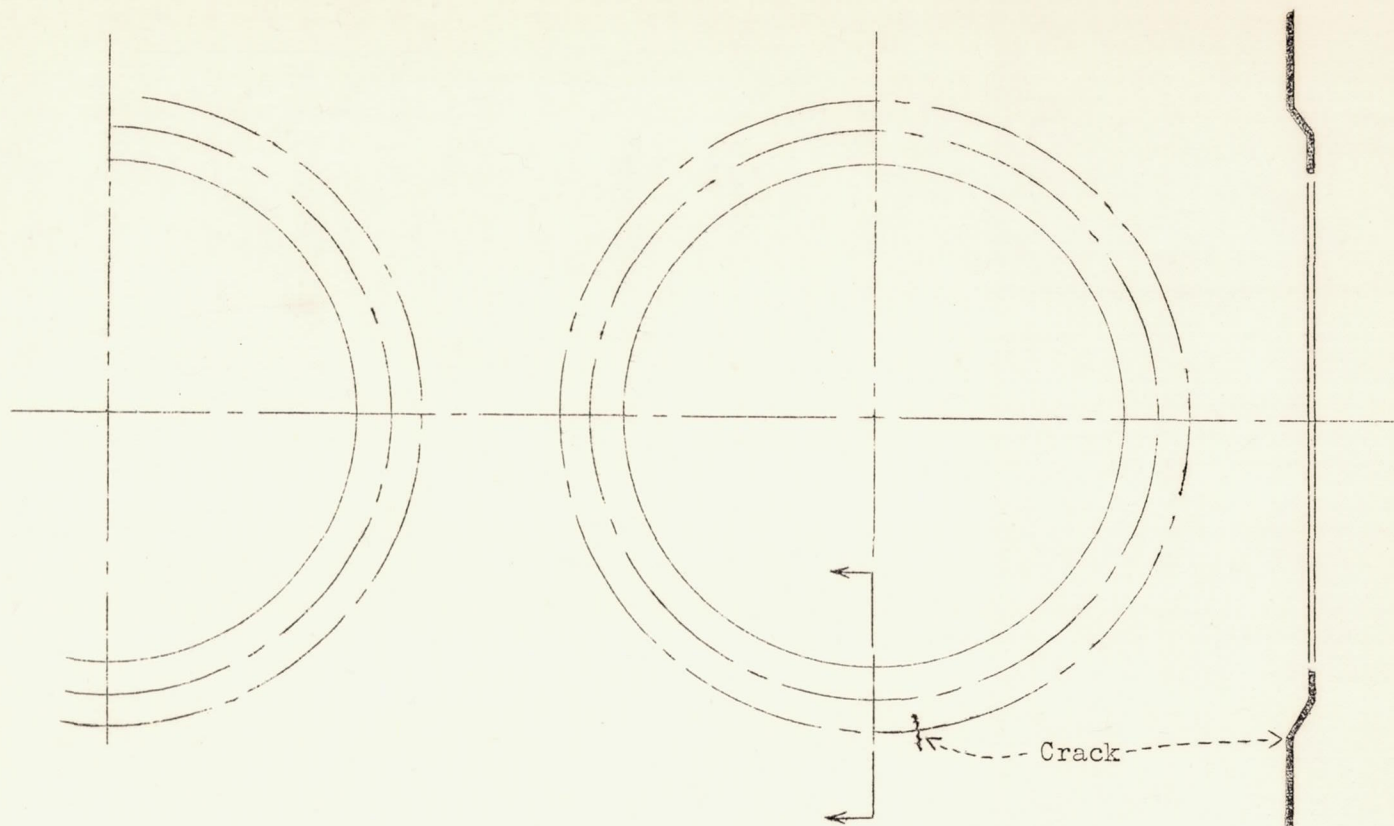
Detail of perforation and origin of first cracks in N.A.F. girder No. 6351-2
